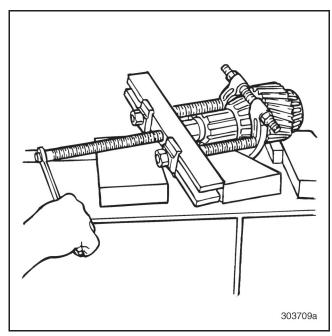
Removing Front-Driving Shaft Front Bearing Cone
